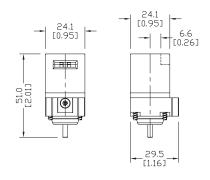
90° adjustable head with shaft hinge interlock - SP2K72, SDM2K72 models
